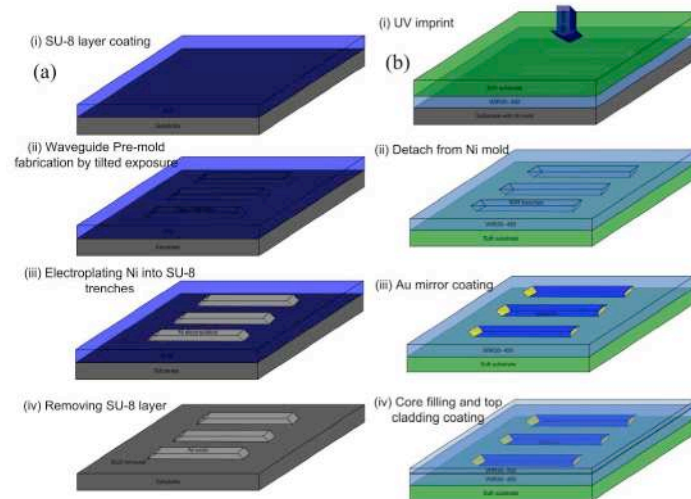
Schematic view of whole process of (a) Ni mold fabrication and (b) polymeric waveguide imprint
